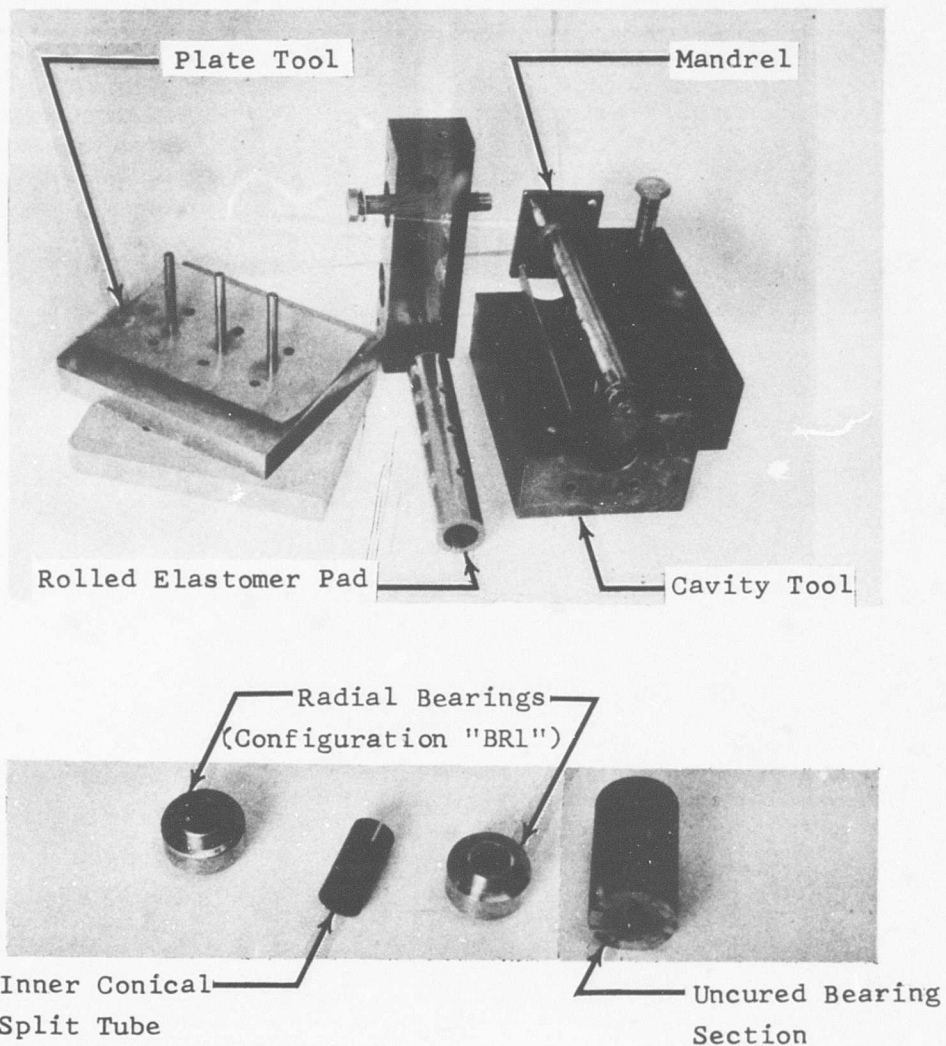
FABRICATION PROCESS FOR BONDED-THIN-ELASTOMER-LAYER RADIAL BEARING.
